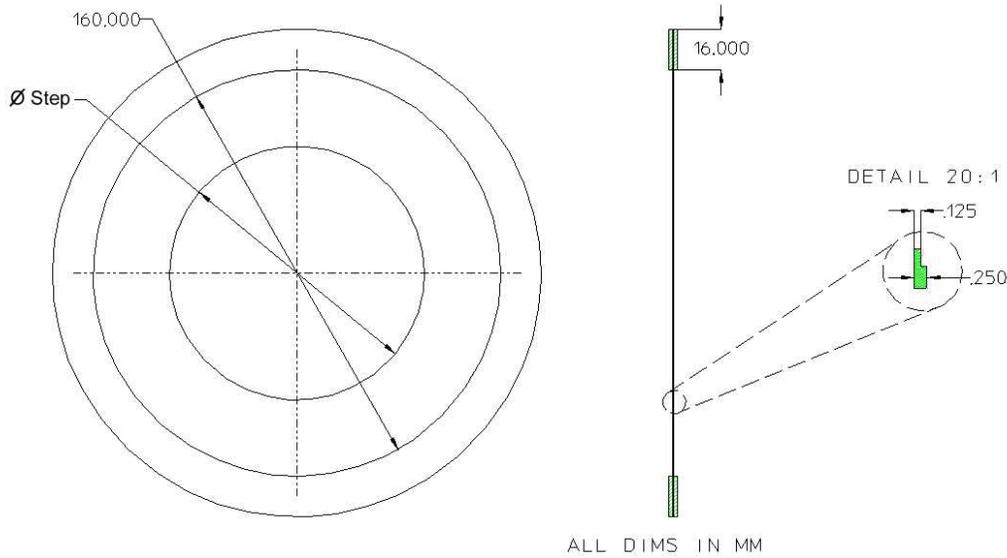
Schematic layout of the step window design showing step diameter and cross section.
